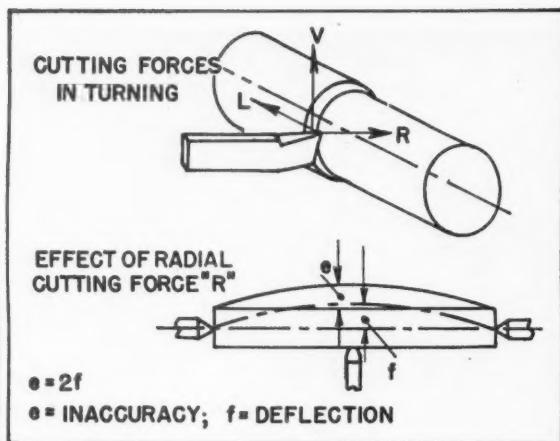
Upper sketch illustrates the three components of cutting force on a workpiece. Lower sketch shows effect of radial cutting force.
